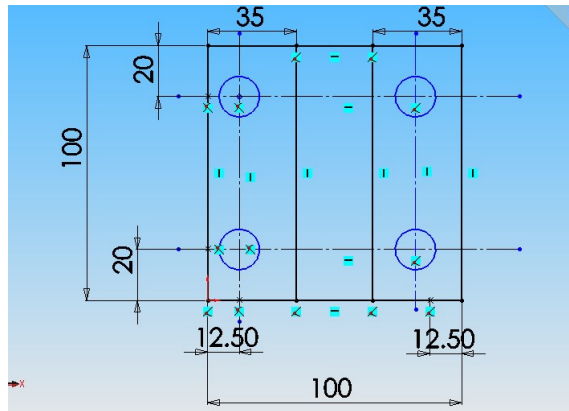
Top view of work piece with the dimension in millimeters (mm)
